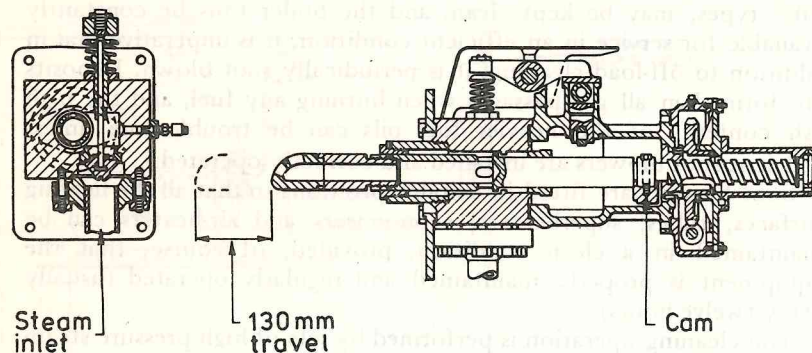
Sectional view of the Babcock & Wilcox marine-type retractable soot blowers (hand-operated)
